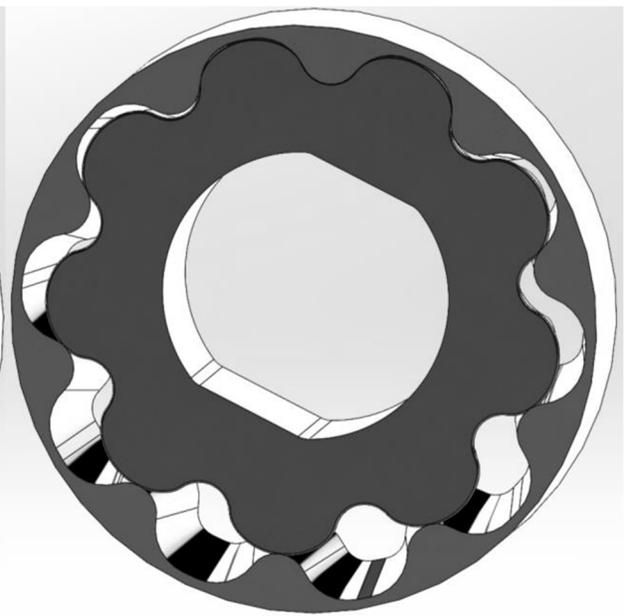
Cross Section 1: On plane cut section of inner and outer rotors
